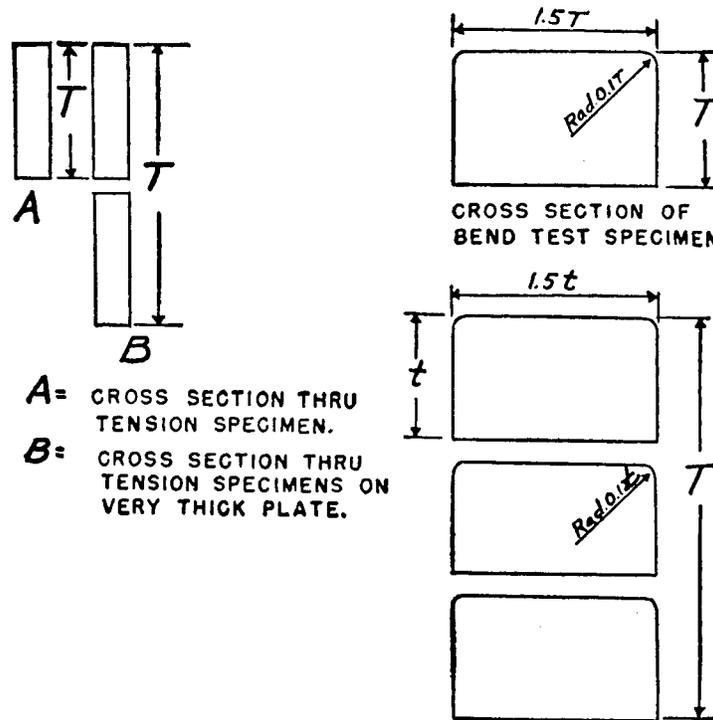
(F)(1)(II)—(PW-53.3) CROSS SECTION OF BEND-TEST SPECIMENS FROM VERY THICK PLATE
